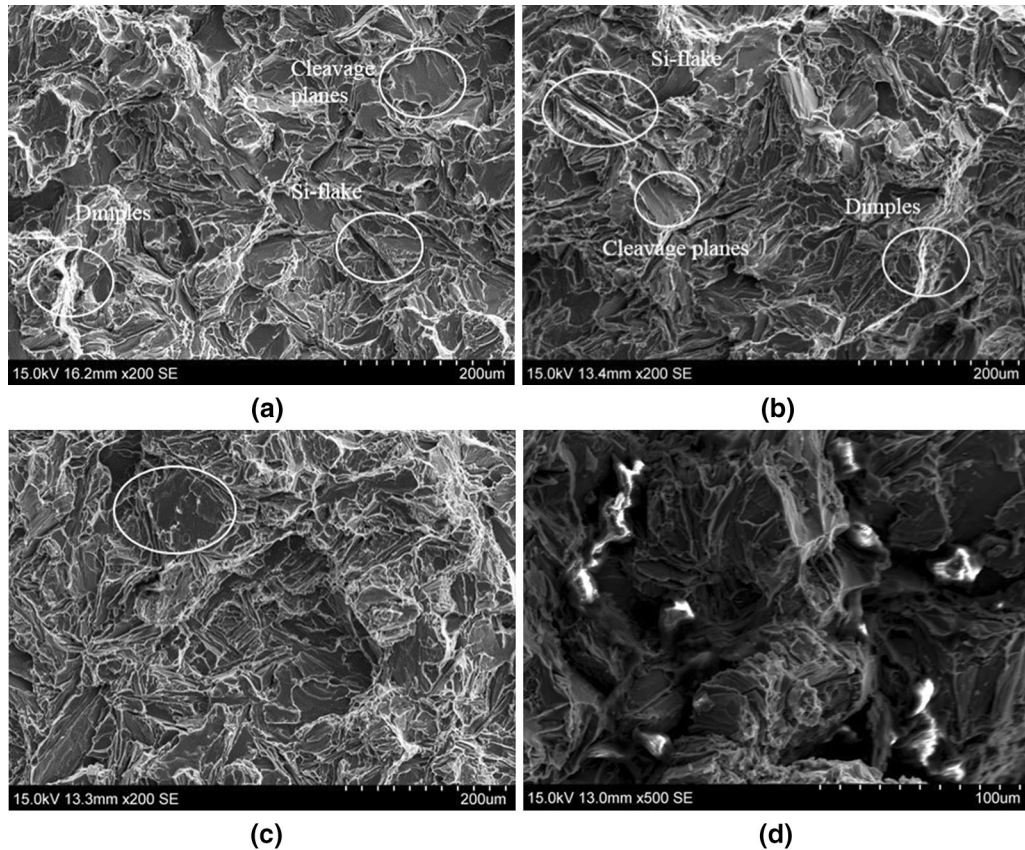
BSE micrographs of the fracture surfaces of sand cast A356 reference in the as-cast (a) and T6 conditions (b) tested after high-temperature tensile test showing the typical features of ductile–brittle mixed fracture. The flake-like morphology of Si particles persists after the solution heat treatment. Ni-rich intermetallics compounds detected in a sand cast as-cast alloy with 600 ppm Ni (c), (d).
